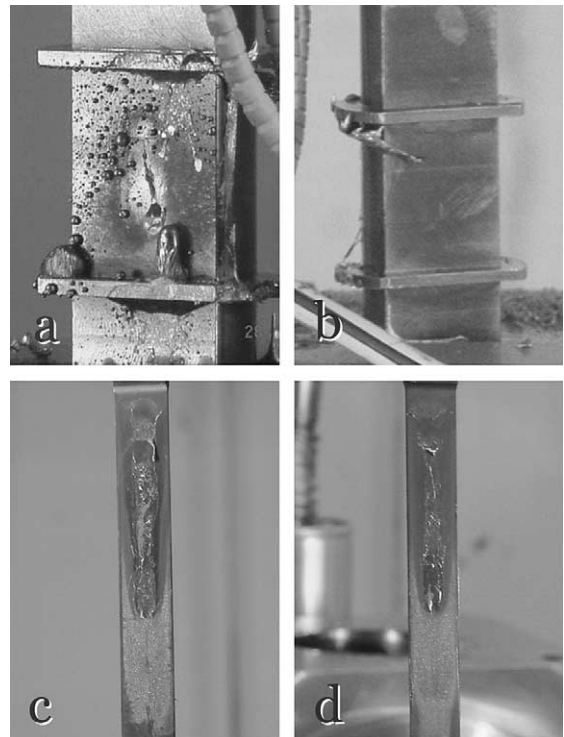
Photographs showing the views of (a) the front side of the tube, (b) the back side of the tube, (c) the front side of the specimen and (d) the back side of the specimen.
